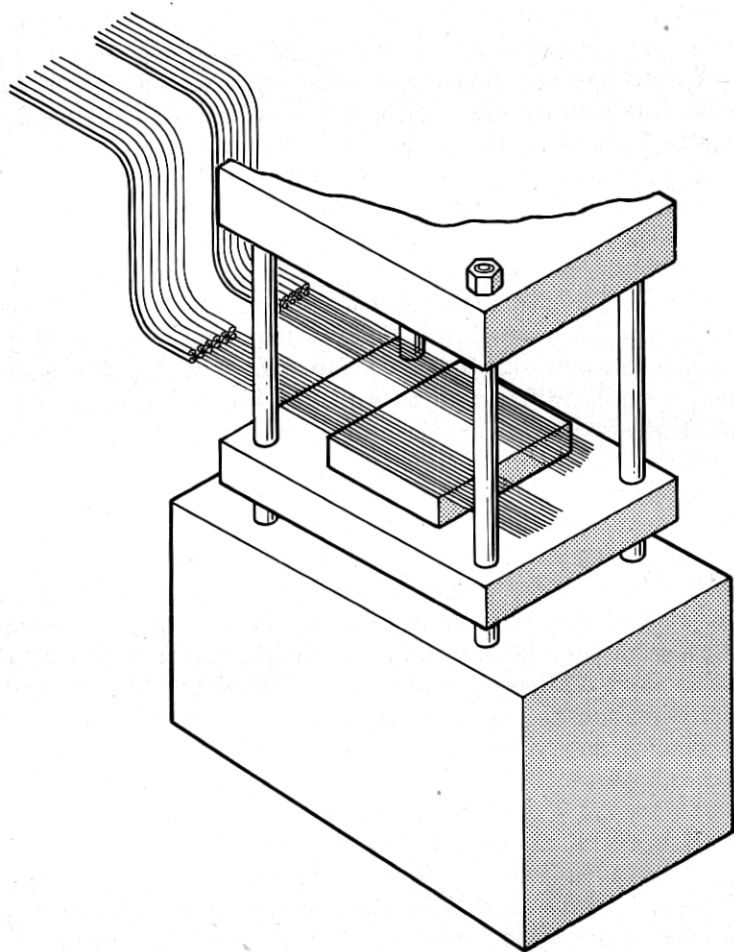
Sketch showing method of handling straightened wire from storage tubes.
